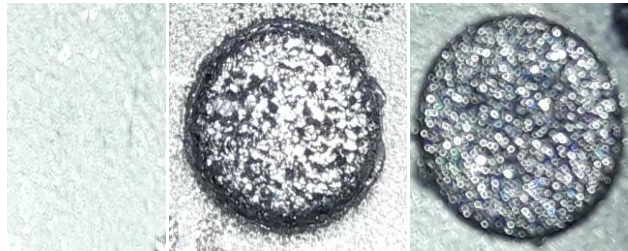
Unmachined surface, machining with Copper electrode, machining with copper tungsten (from left to right)
